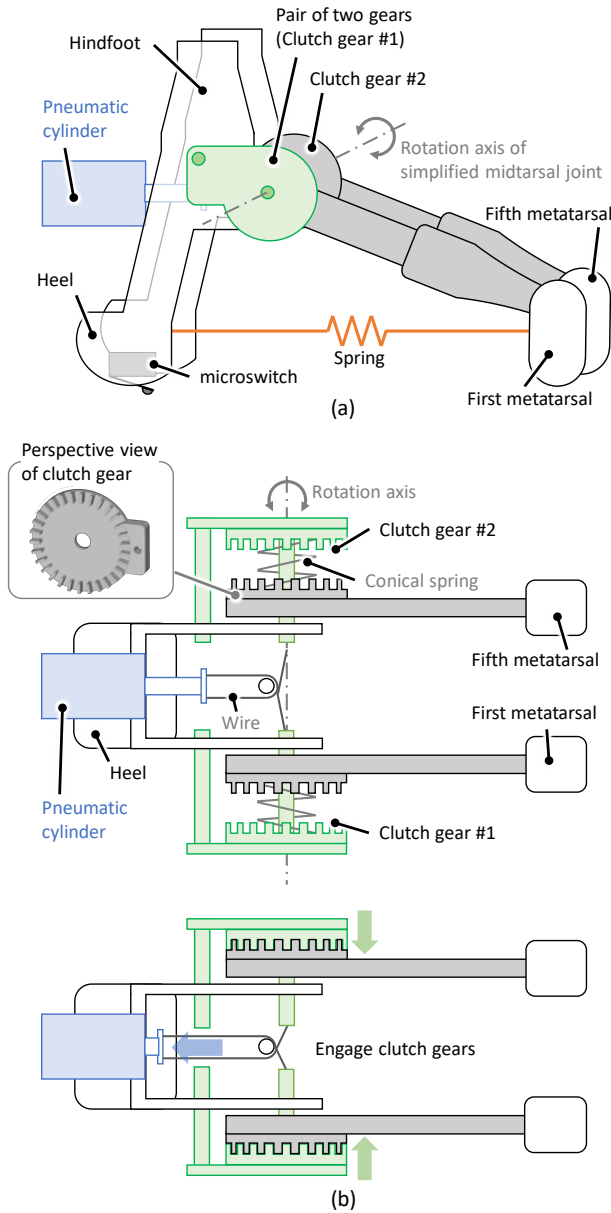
Structure and working principle of the joint locking mechanism of the proposed foot: (a) Perspective and (b) top views of the foot. Engaging the clutch gears attached to the midtarsal joint locks its joint movement. Upper and bottom of the figure (b) correspond to the unlock and lock states of the midtarsal joint, respectively.
